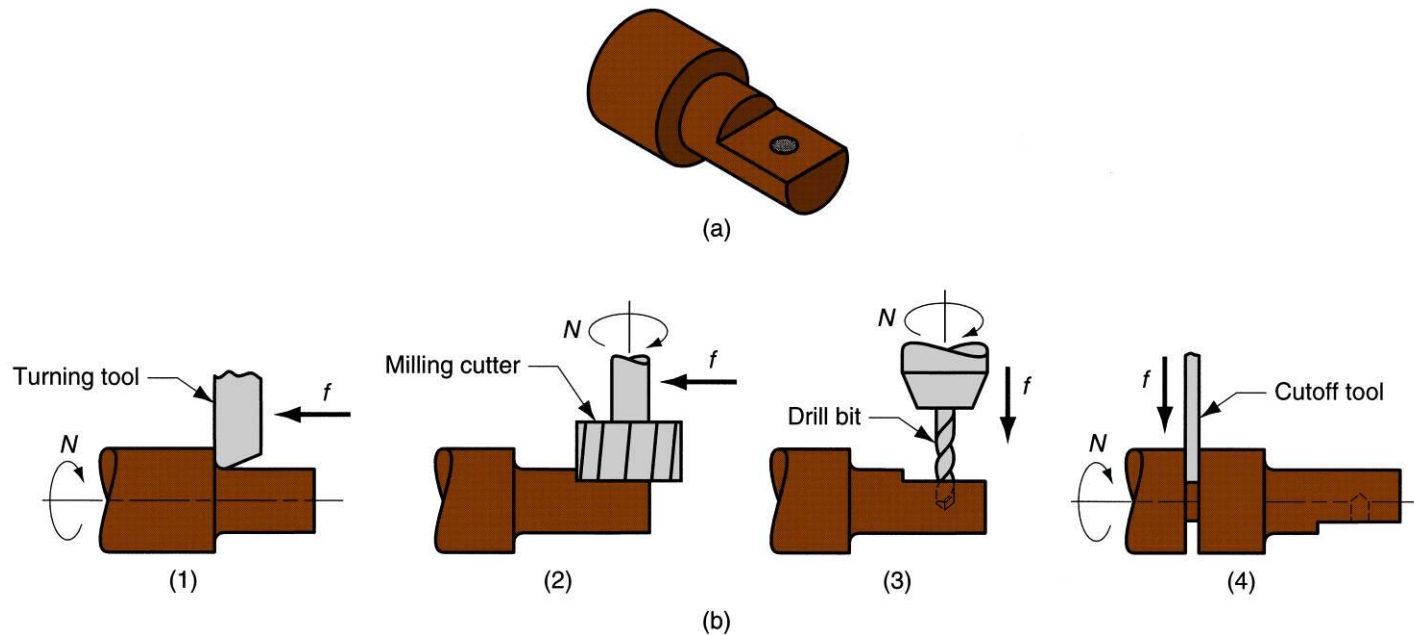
Operation of a mill-turn center: (a) example part with turned, milled, and drilled surfaces; and (b) sequence of operations on a mill-turn center: (1) turn second diameter, (2) mill flat with part in programmed angular position, (3) drill hole with part in same programmed position, and (4) cutoff.
